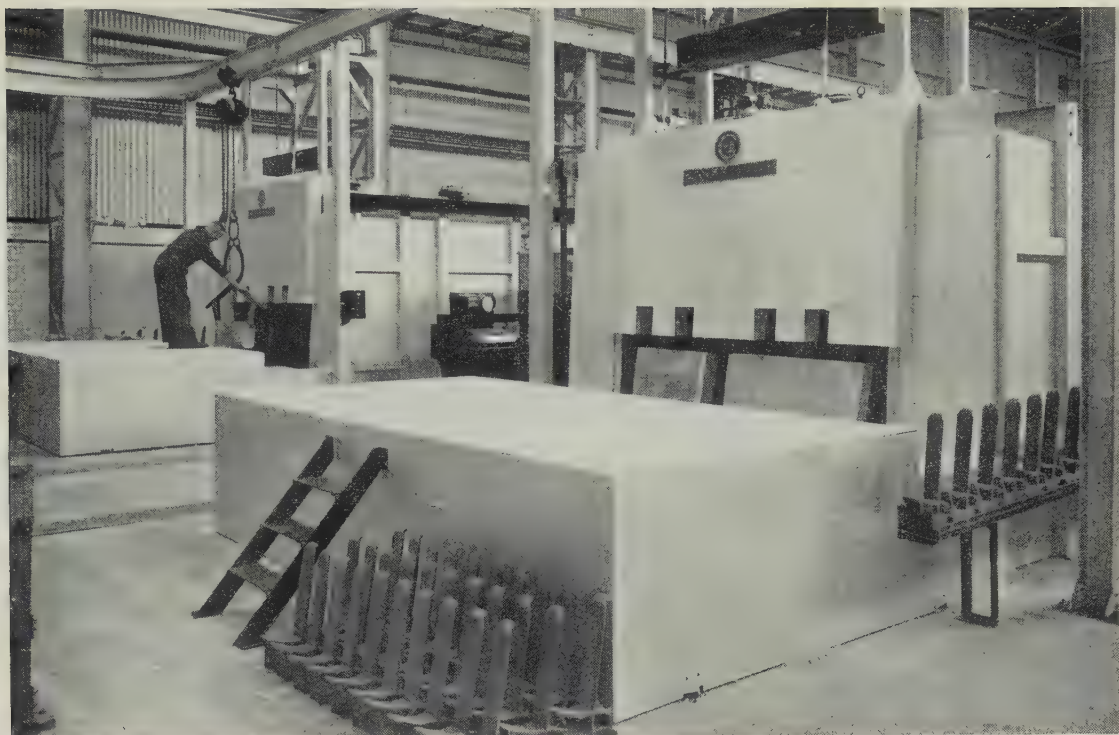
Two Billet-Heating Furnaces, Showing Method of Conveying Billets Through the Furnace.
